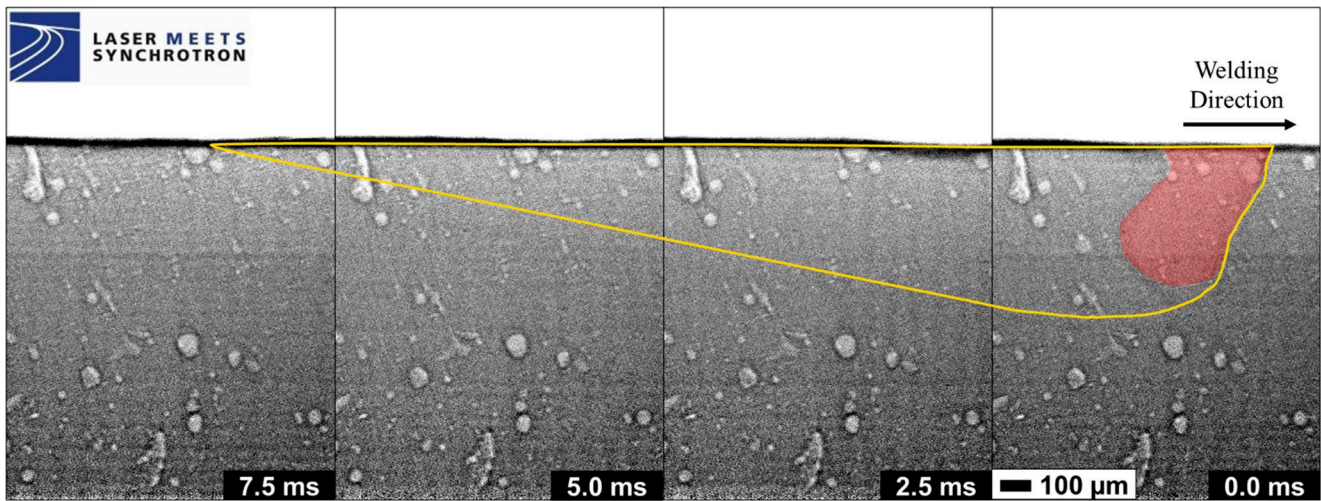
Stitched X-ray image sequence for the laser welding of laser-dried material (D4). The shape of the weld pool is indicated by the yellow line, the capillary is highlighted in red. Laser welding parameters
